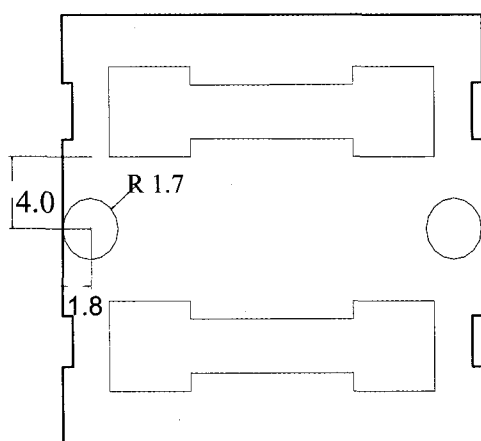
Channel 3 - Final design used. Alignment holes added to match with fixturing device (dimensions the same as Figure 17 unless otherwise specified)
